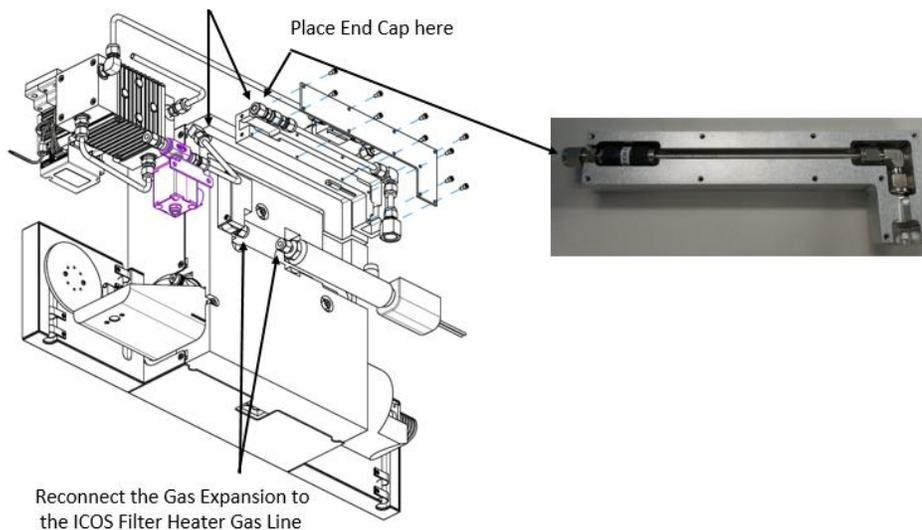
Gas Expander Heater – ICOS Filter Heater Connection Point
